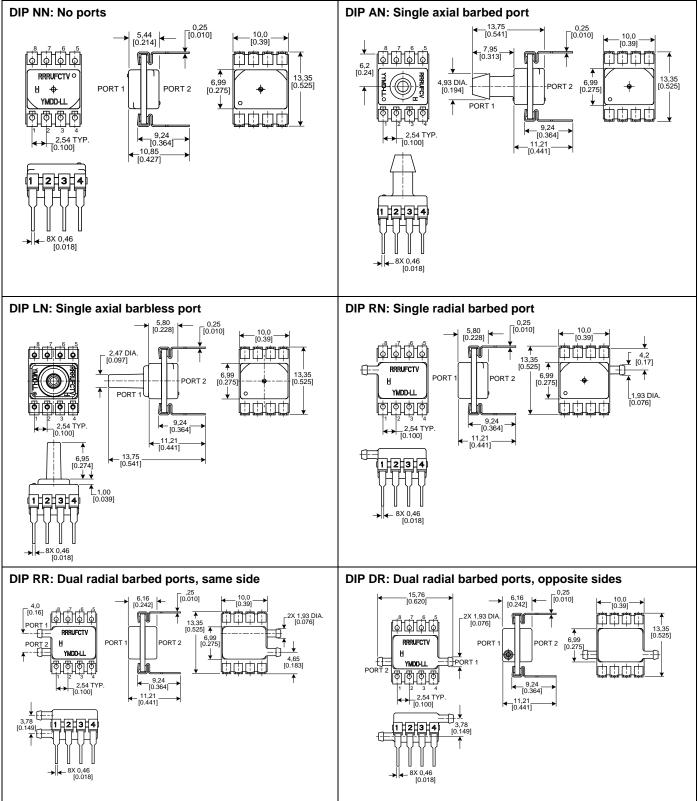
DIP Pressure Port Dimensional Drawings (For reference only: mm [in])
